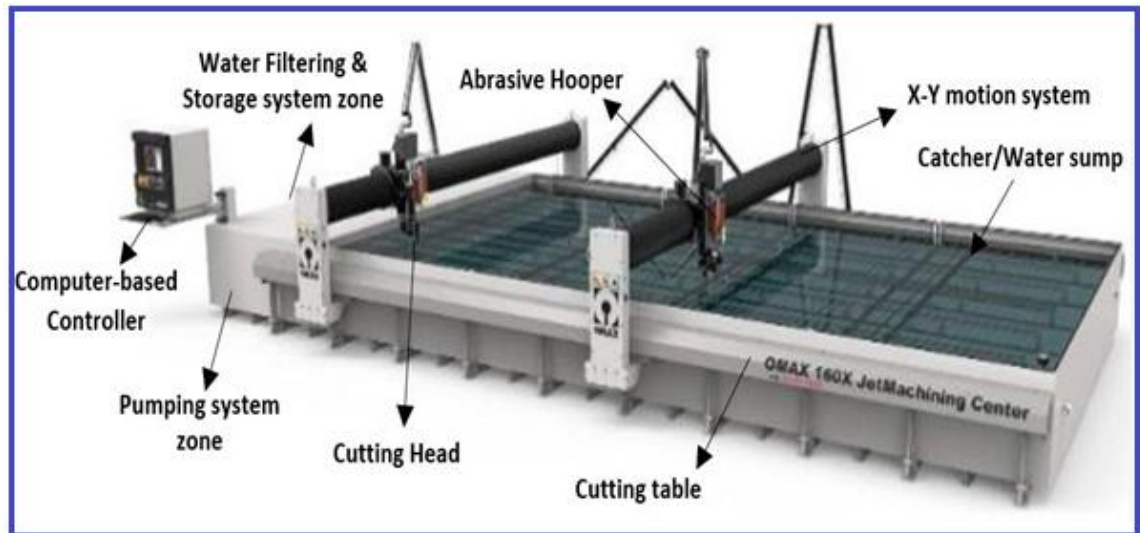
Image of the Model 160X JMC AWJ Machine [6]
